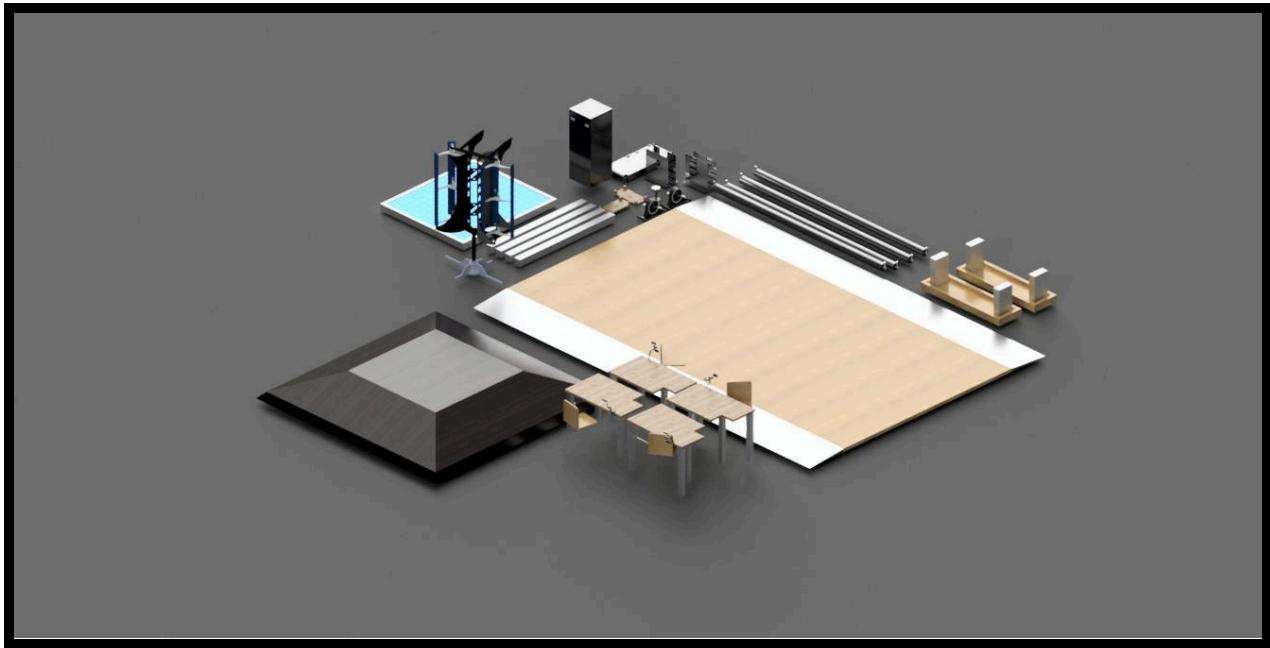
Exploded Assembly of the full Outdoor Active Workstation
